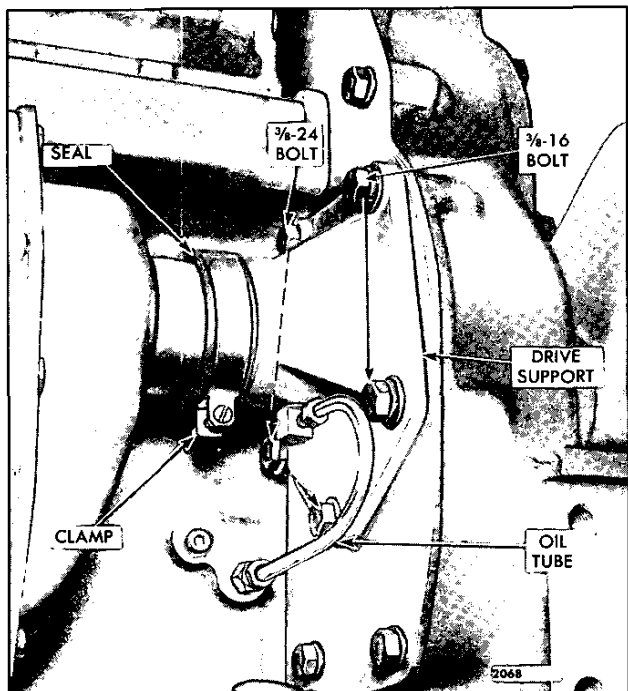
Blower Drive Support Mounting on 4-53 In-line Engine
